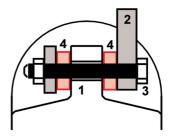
Structurally designed fixing point (B) for the torque arm on a shaft-mounted flat-geared motor
